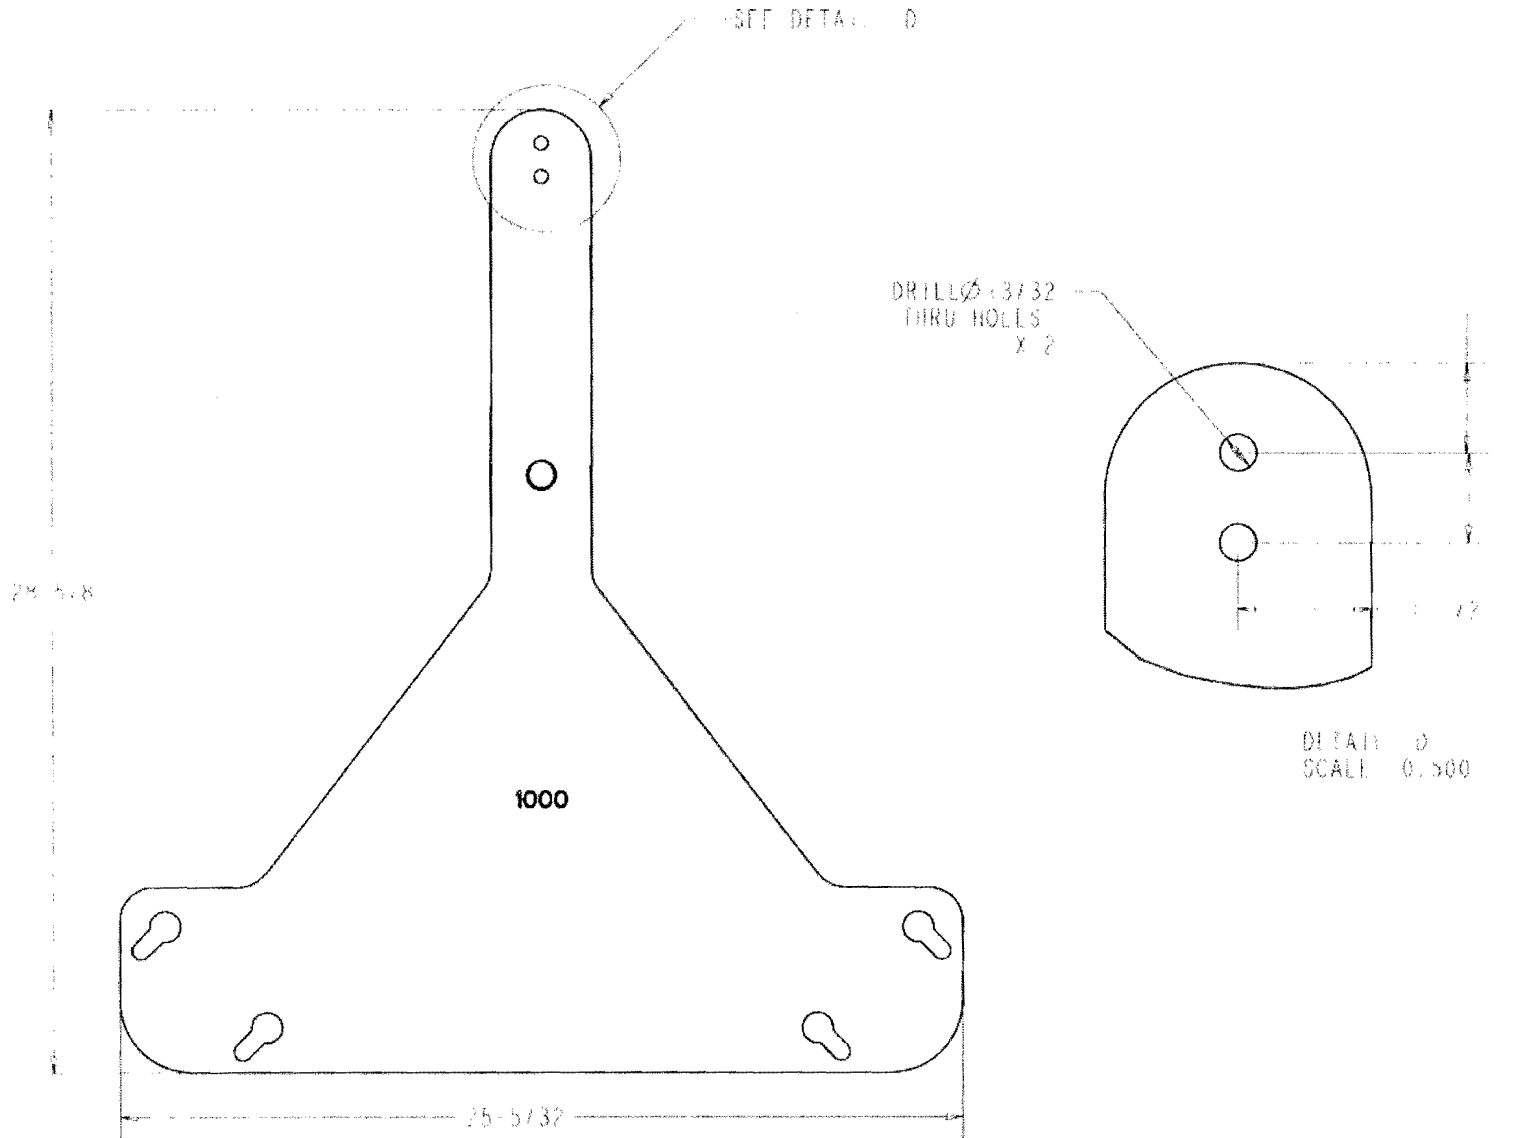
(E)—TIRE CARRIER ASSEMBLY
